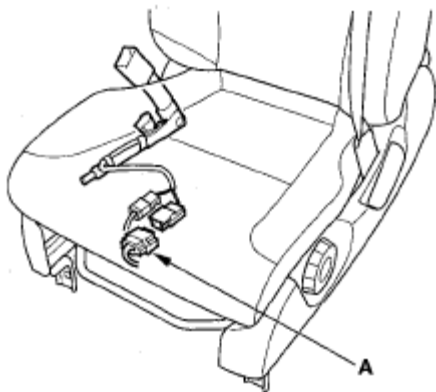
Identifying Seat Belt Buckle Tensioner Floor Wire Harness Connector
